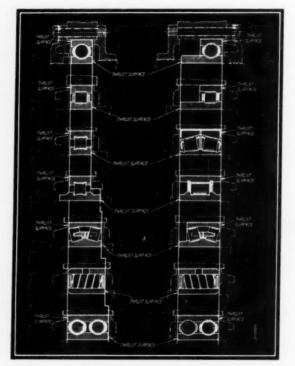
Noninterchangeable and interchangeable ball and roller bearings of various makes
